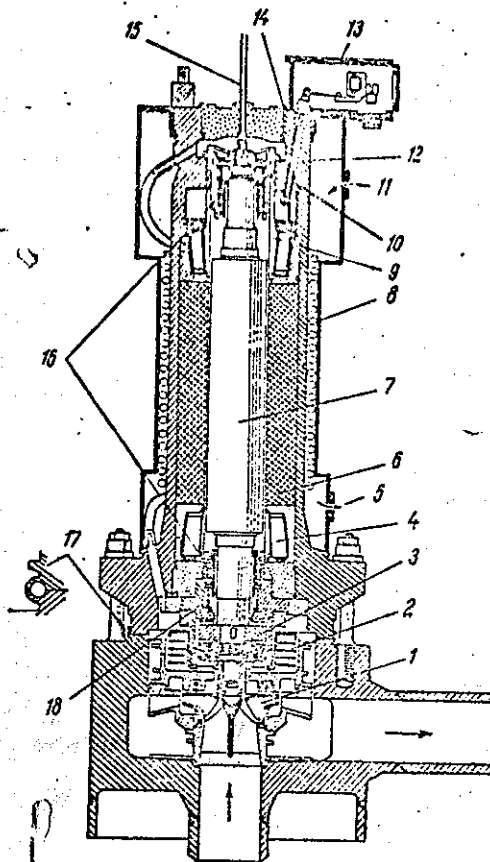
Main circulator pump in the first loop in Valiant. 1 - pump impeller; 2 - heat shield; 3 - thrust bearing; 4 - stator winding; 5 - cooling water outlet; 6 - stator; 7 - rotor; 8 - stator cooling tubes; 9 - water-protective envelope; 10 - electric power supply; 11 - cooling water inlet; 12 - cooling pump; 13 - connection box; 14 - 17 - toroidal seal; 15 - water blowdown; 16 - supporting bearings; 18 - thrust bearings.
